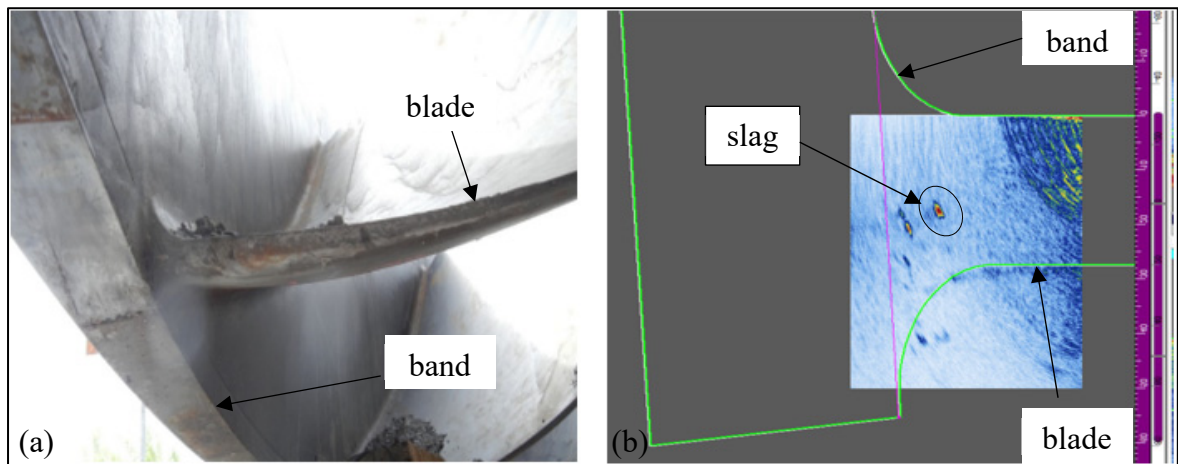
Blade-to-band weld joint of the runner with an example of TFM indications
